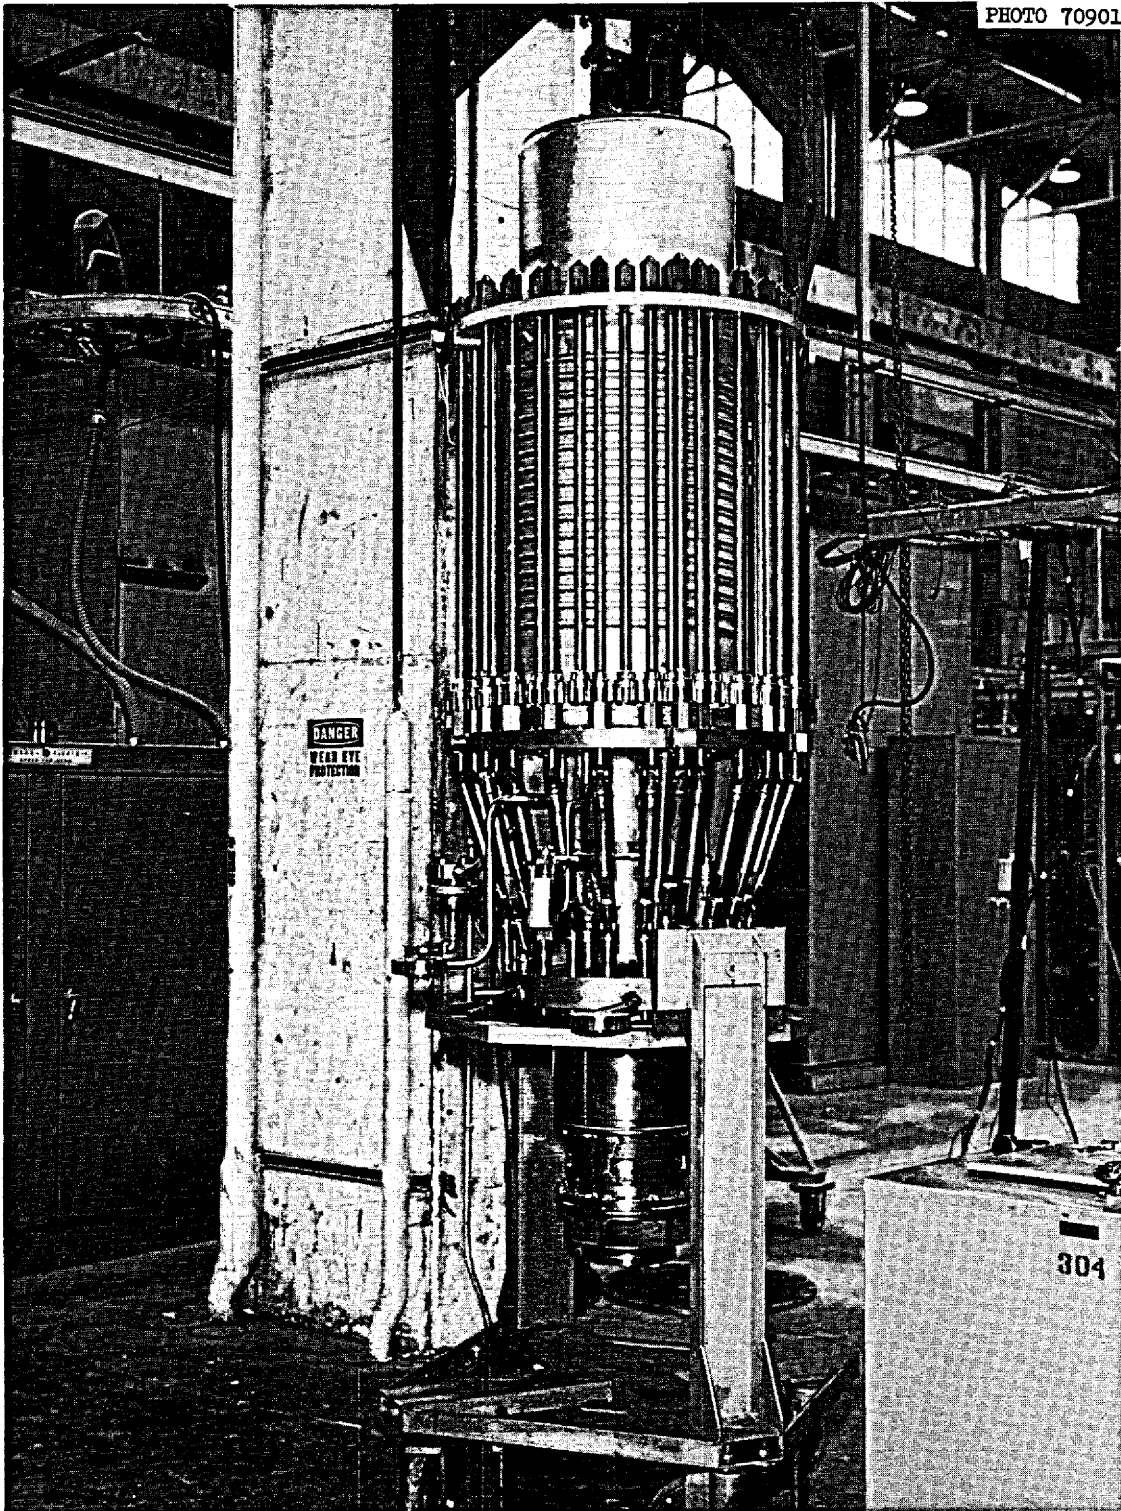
Fuel-Salt Pump Drive Motor, Rotary Assembly, and Bolting for Remote Maintenance.
